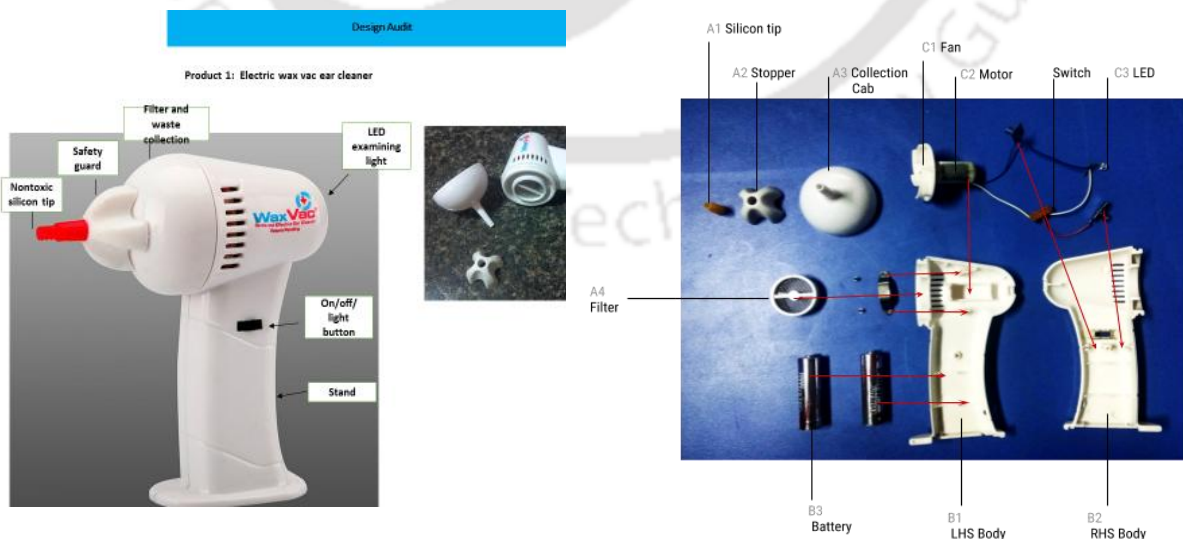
Earwax Remover product with its parts as part of reverse engineering
